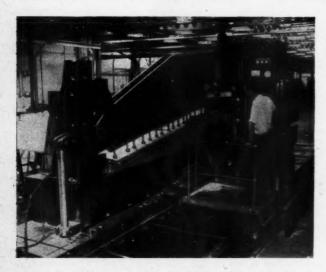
Close-up view of the traversing column and cutter head assembly on the machine shown in Fig. 1 and 2. [By courtesy of Vickers-Armstrongs (Aircraft), Ltd.]
